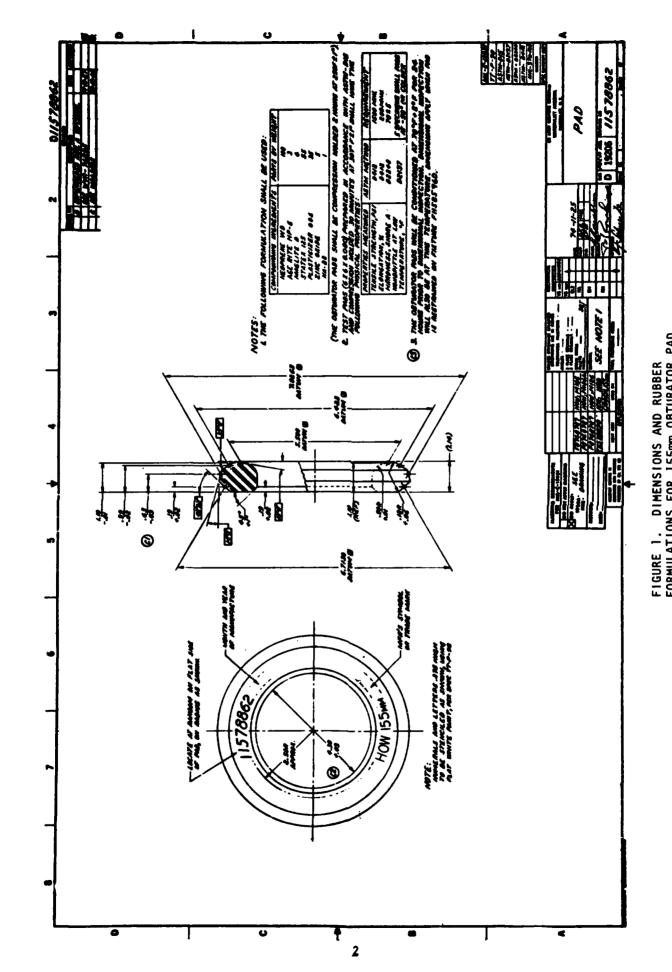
DIMENSIONS AND RUBBER FORMULATIONS FOR I55mm OBTURATOR PAD
